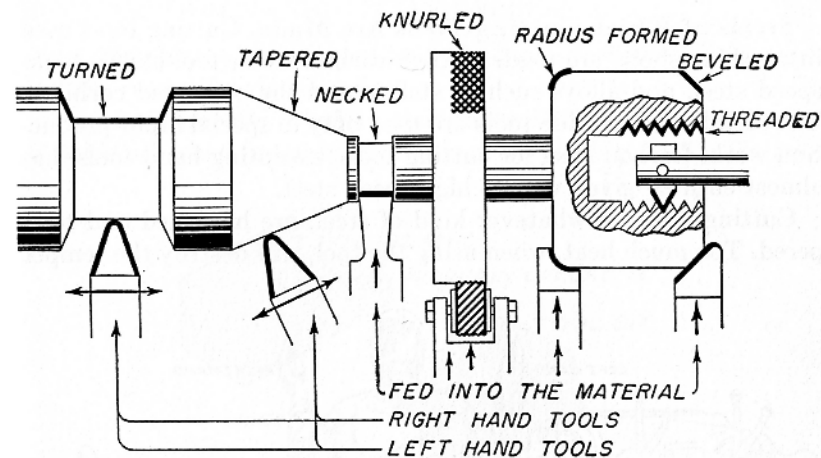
This illustration establishes the terms that apply to various lathe operations performed on different surfaces of a workpiece. It also shows the character of tools used and the direction of tool movement. Note that right-
